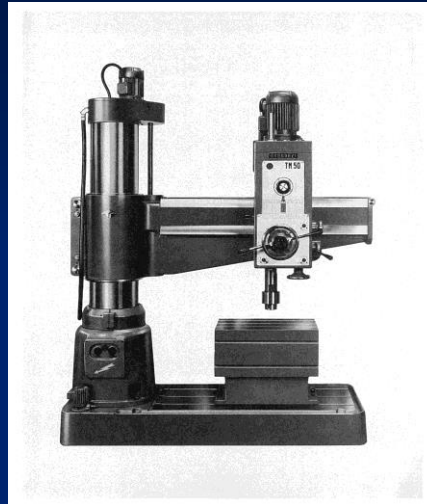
Radial drill press (Willis Machinery and Tools)
